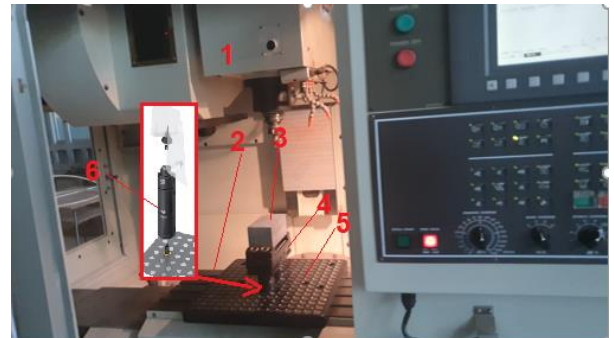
machining set-up : 1-machine tool, 2-machine table, 3-stock, 4-self-centering vice, 5-base plate, 6-breyl assembly.
